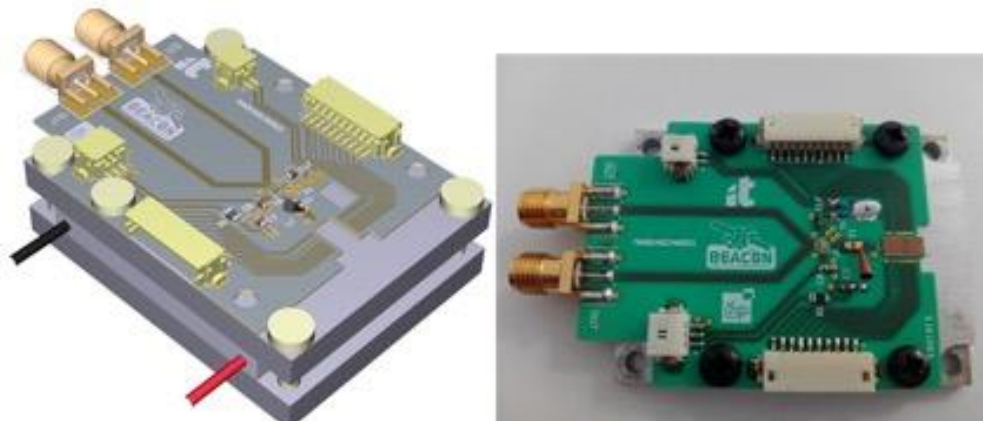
Beamformer (left) PCB design and (right) with all parts placed
